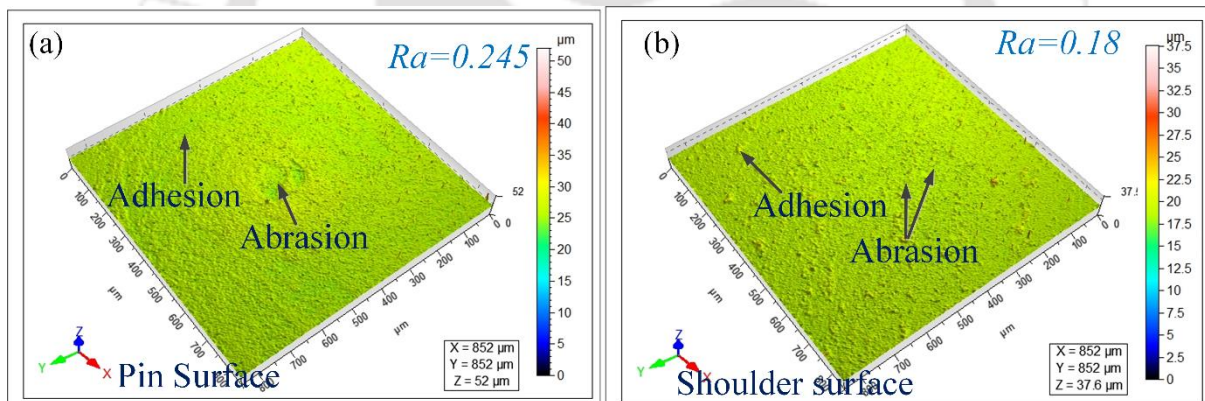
Surface roughness values: (a) tool pin surface, and (b) tool shoulder surface
